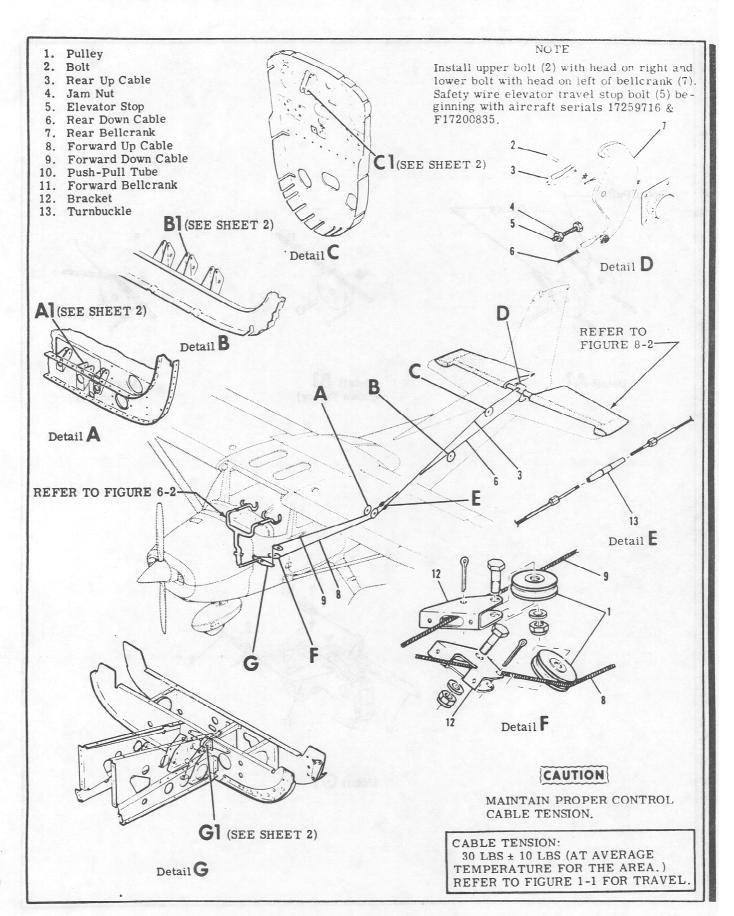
Elevator Control System (Sheet 1 of 2)
